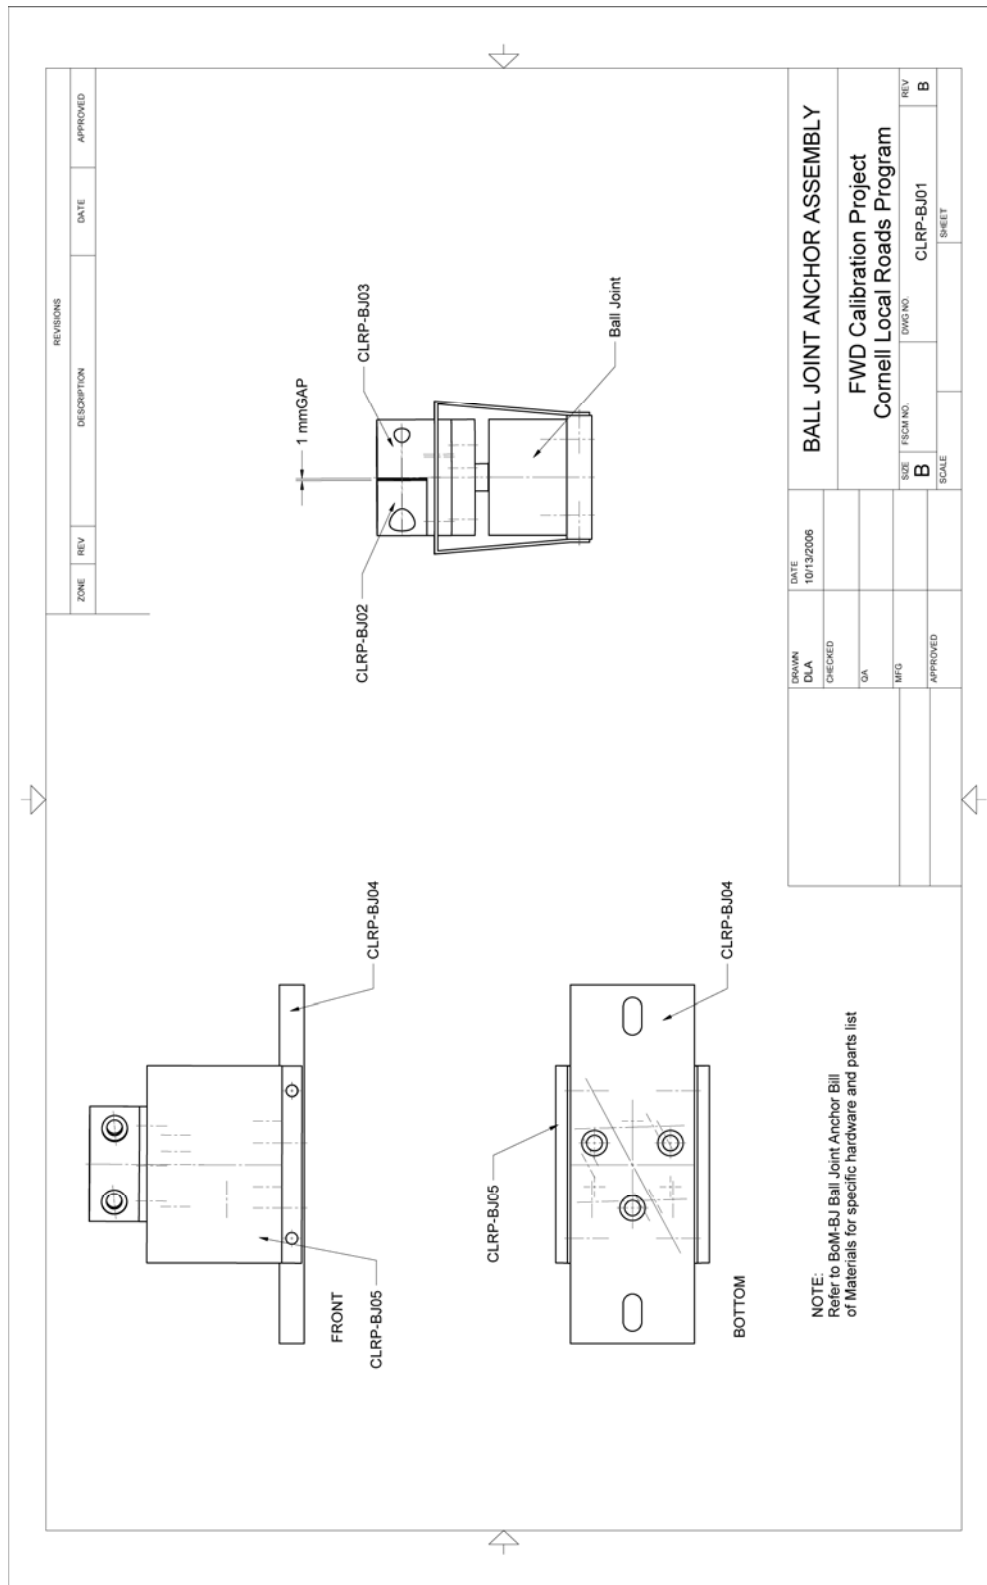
Drawing. CLRP-BJ01 Ball Joint Anchor Assembly.
